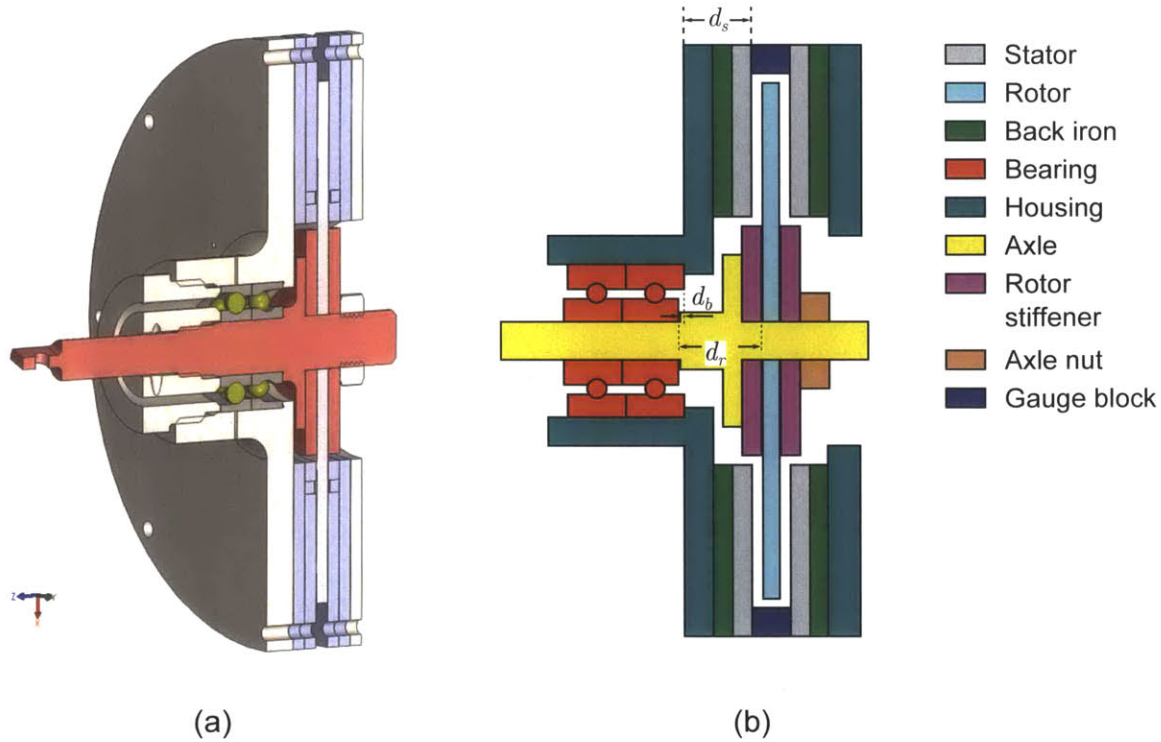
Motor cross-section (a) CAD drawing (b) Schematic with parts labeled with colors.
